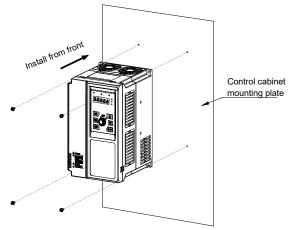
Wall-mounted Installation Diagram of Plastic Structure 2. Embedded installation of plastic structure Embedded installation support
